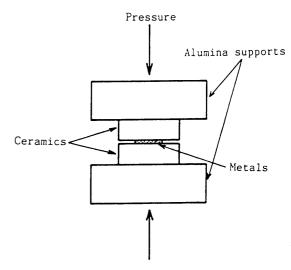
Size and shape of specimens and schematic drawing of assembly for solid state reaction bonding.
